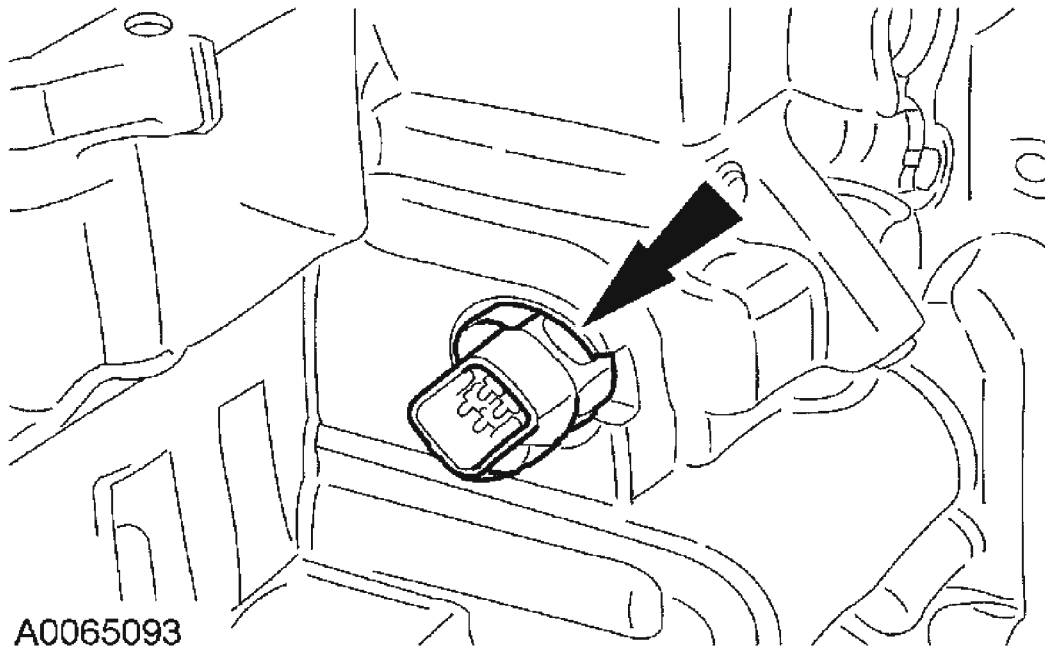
Installing Transaxle Internal Harness Electrical Connector
